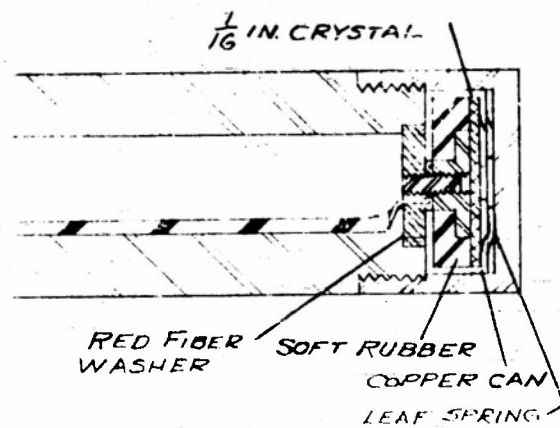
Suggested Design for Nose Element and Cap Assembly.
